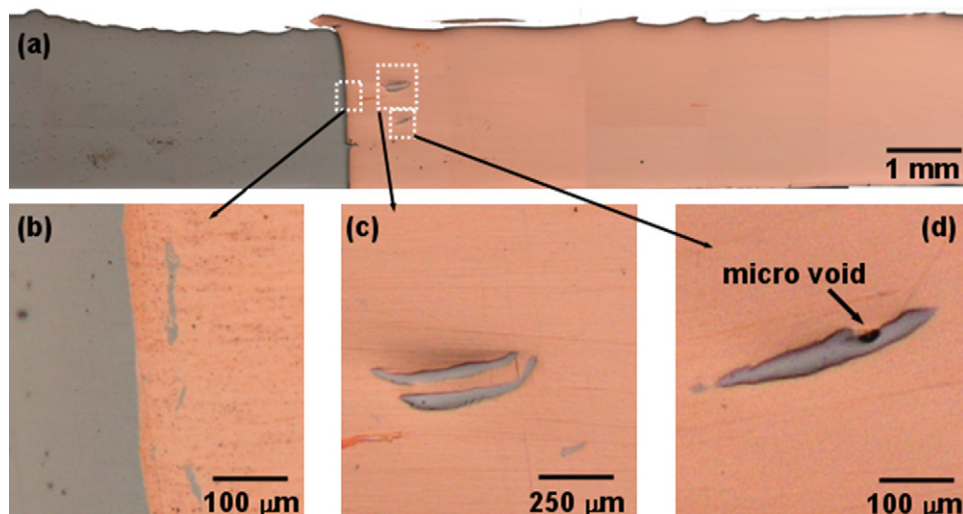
OM images showing the (a) cross-sectional macrostructure of the stir zone perpendicular to the welding direction, (b) small and (c) blocky BMG fragments with smooth surface, and (d) blocky BMG fragments with micro-void.
